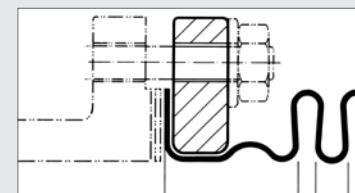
Form-fitted connection between bellows and lap-joint flange
